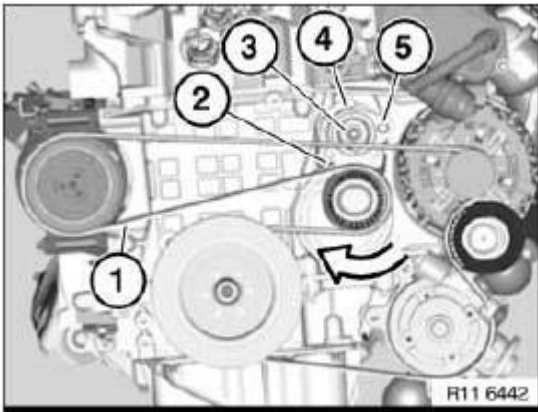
Identifying Belt Tensioner, Screw And Belt Drive
